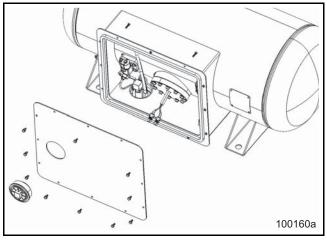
E-150/250/350 Extended Range Tank Cover Plate
